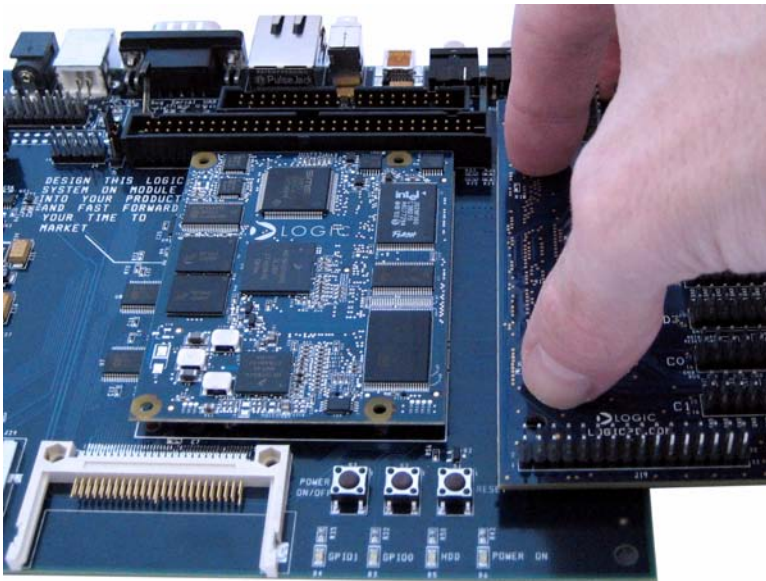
Connecting the Breakout Board to the Baseboard
